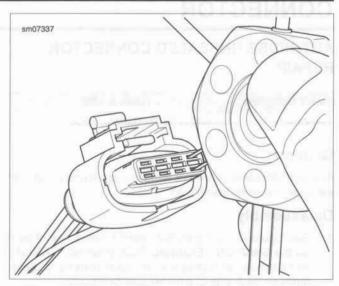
Terminal Removal: Bosch Compact 1.1M Connector
